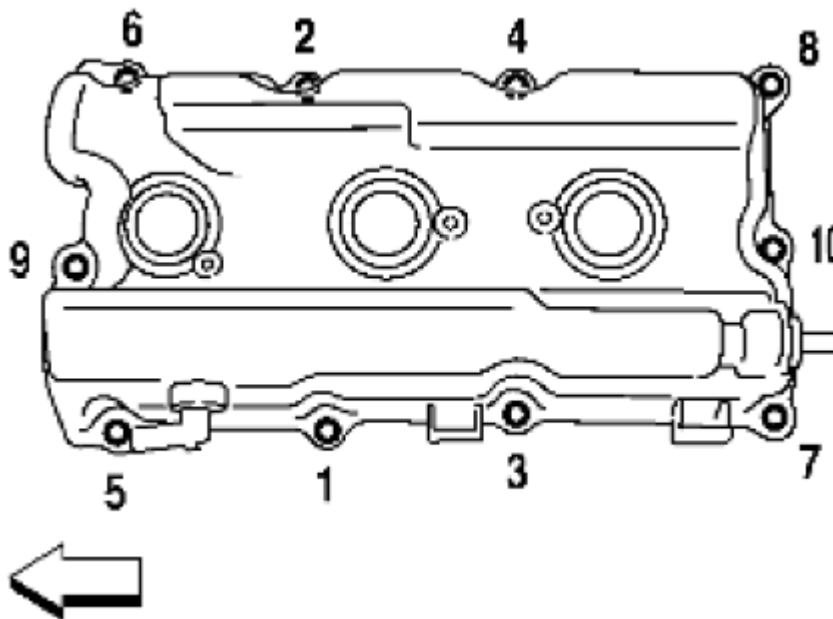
Identifying Rocker Cover Bolts Tighten Sequence
